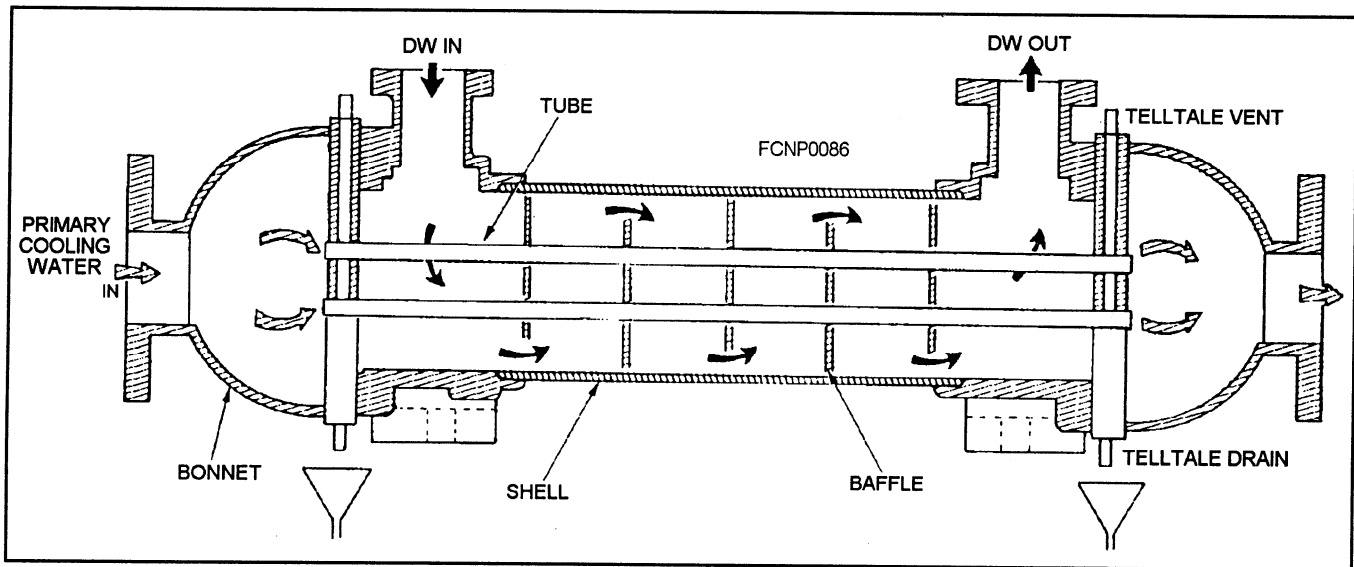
Single-pass SW/DW heat exchanger with double-tube sheets.
